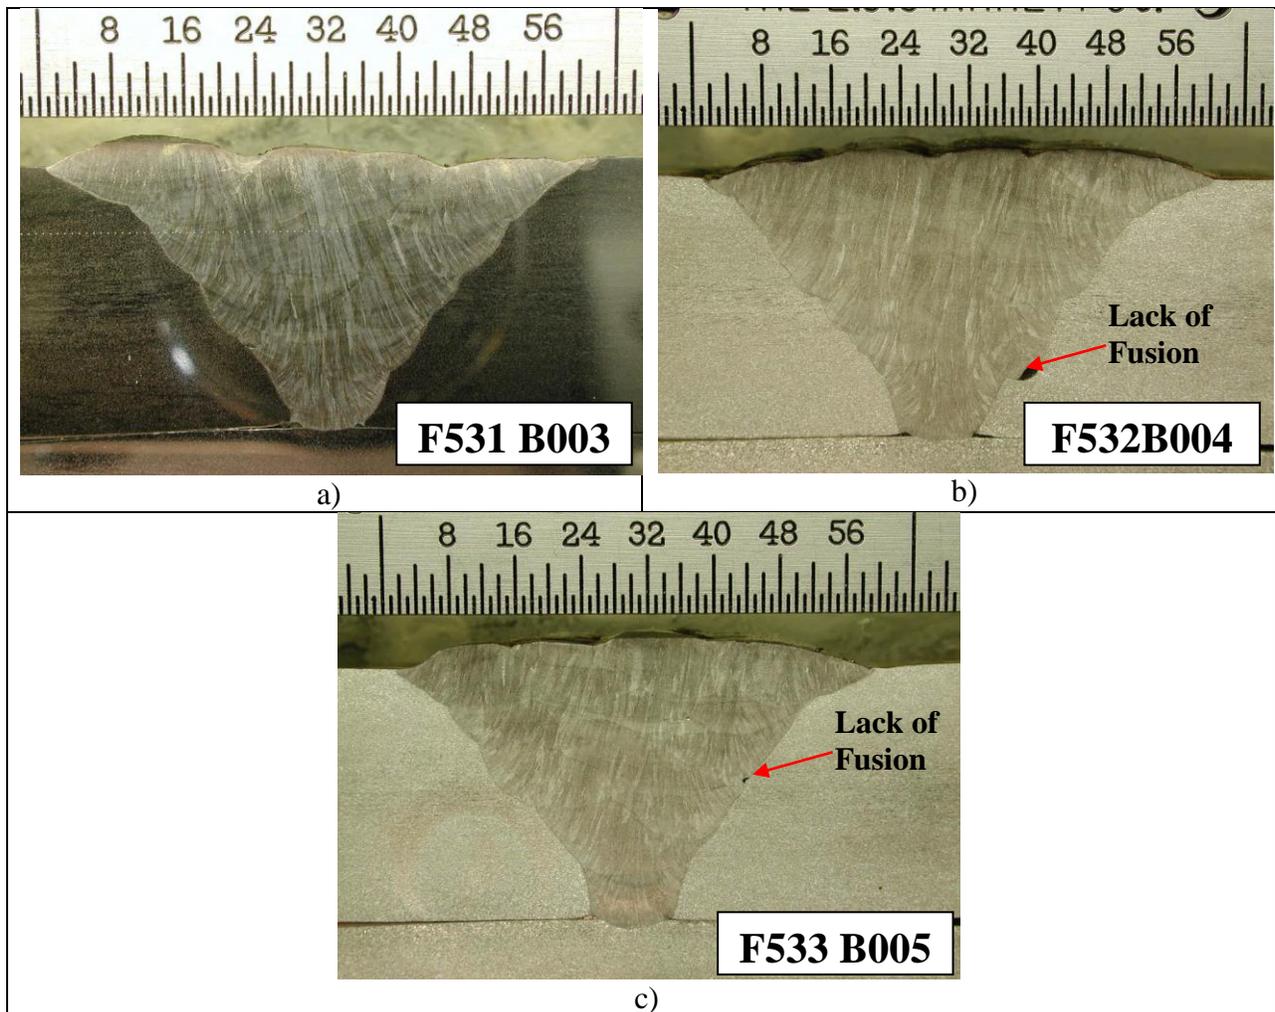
Macrostructure of the E308L-16 Baseline Welds Showing Sidewall Lack of Fusion Defects
